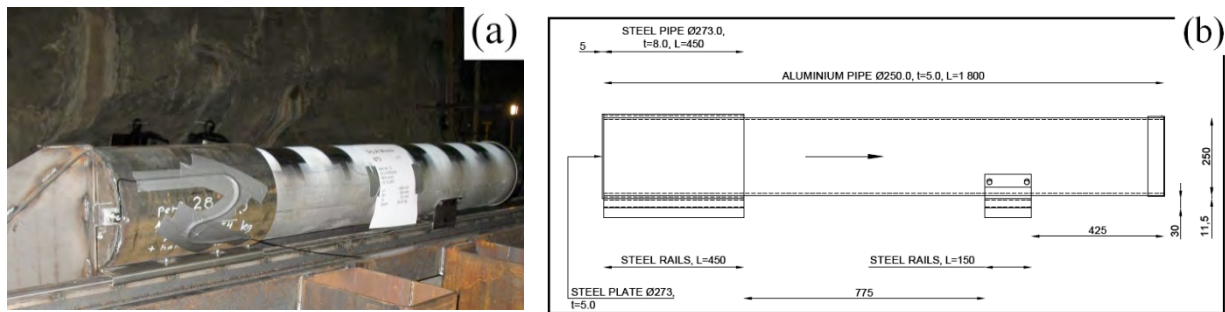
Photograph of aluminium missile with steel rear (a) and related engineering drawing (b) (pictures provided by VTT).
